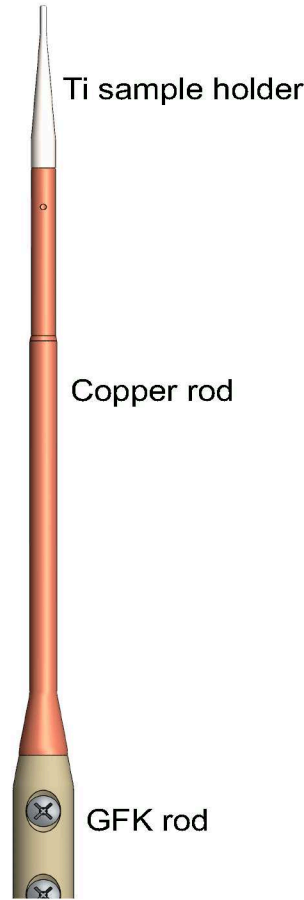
Sample holder mounting assembly with copper support rod and GFK insulation rod.
